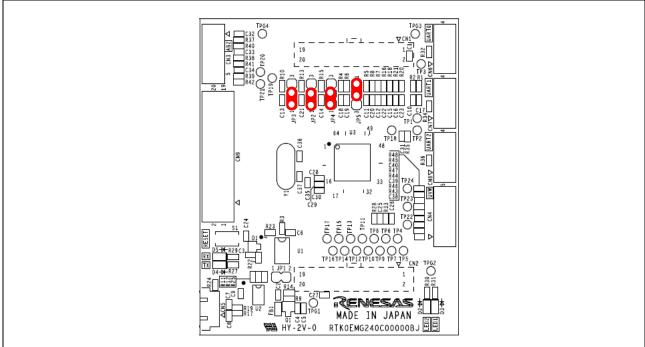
Jumper Pin Assignment on Board - Inverter Board
